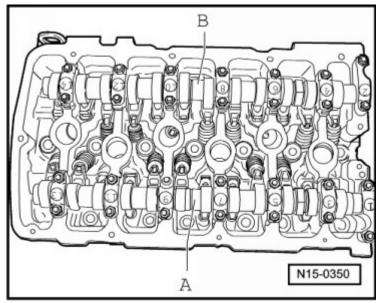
Locating Control Housing-To-Cylinder Head Bolts Courtesy of AUDI OF AMERICA, LLC
